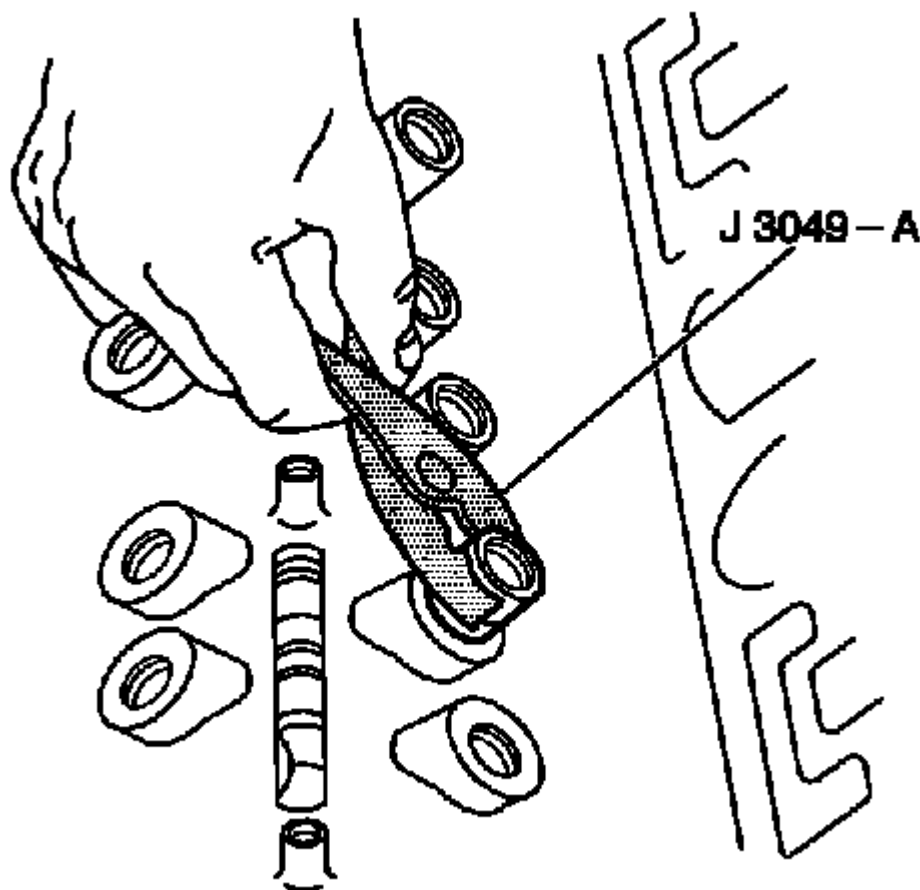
View Of Using Special Tool J 3049-A To Remove Sticking Valve Lifters
